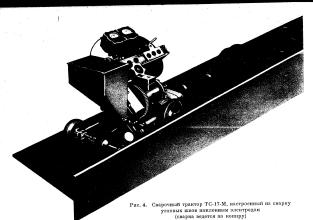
Welding Tractor TC-17-M arranged for angle (fillet) we with inclined electrode (welding by means of a "copy" jig)
